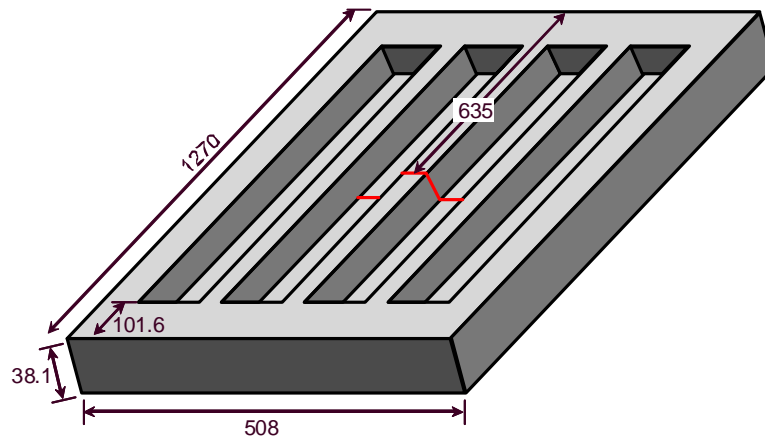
Five-stringer panel containing a crack that divides the central stringer. All dimensions in mm.
